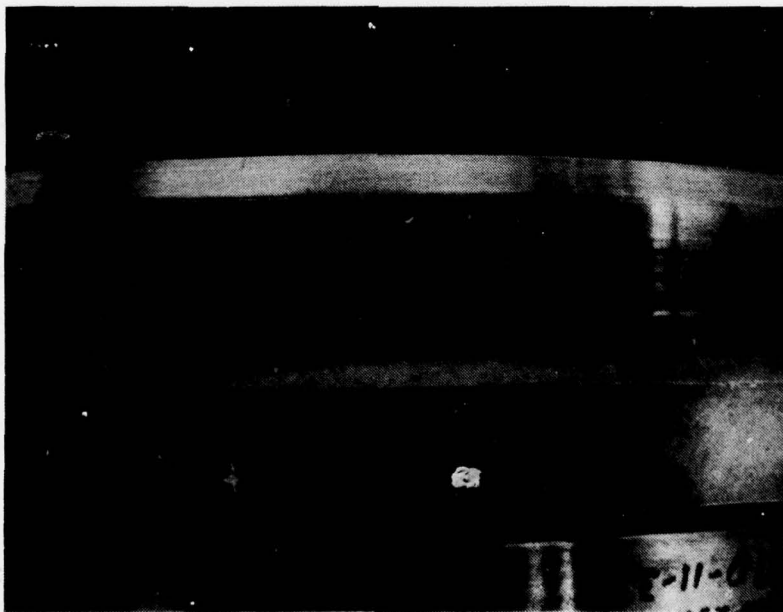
Main input seal wear sleeve after fourth loss-of-lube test.
